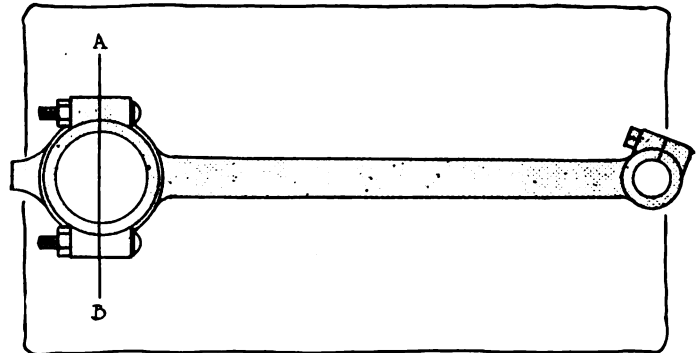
Connecting-rod, showing horizontal plane A B in which forces are applied to crankpins
